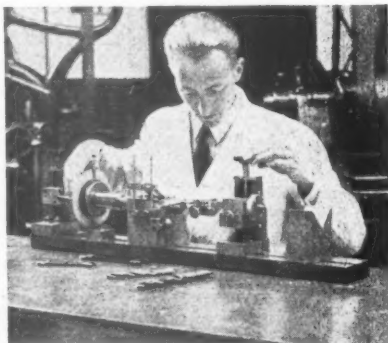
Drill checking instrument for (a) Angle of relief, (b) cutting angle, (c) symmetry of cutting edges.
